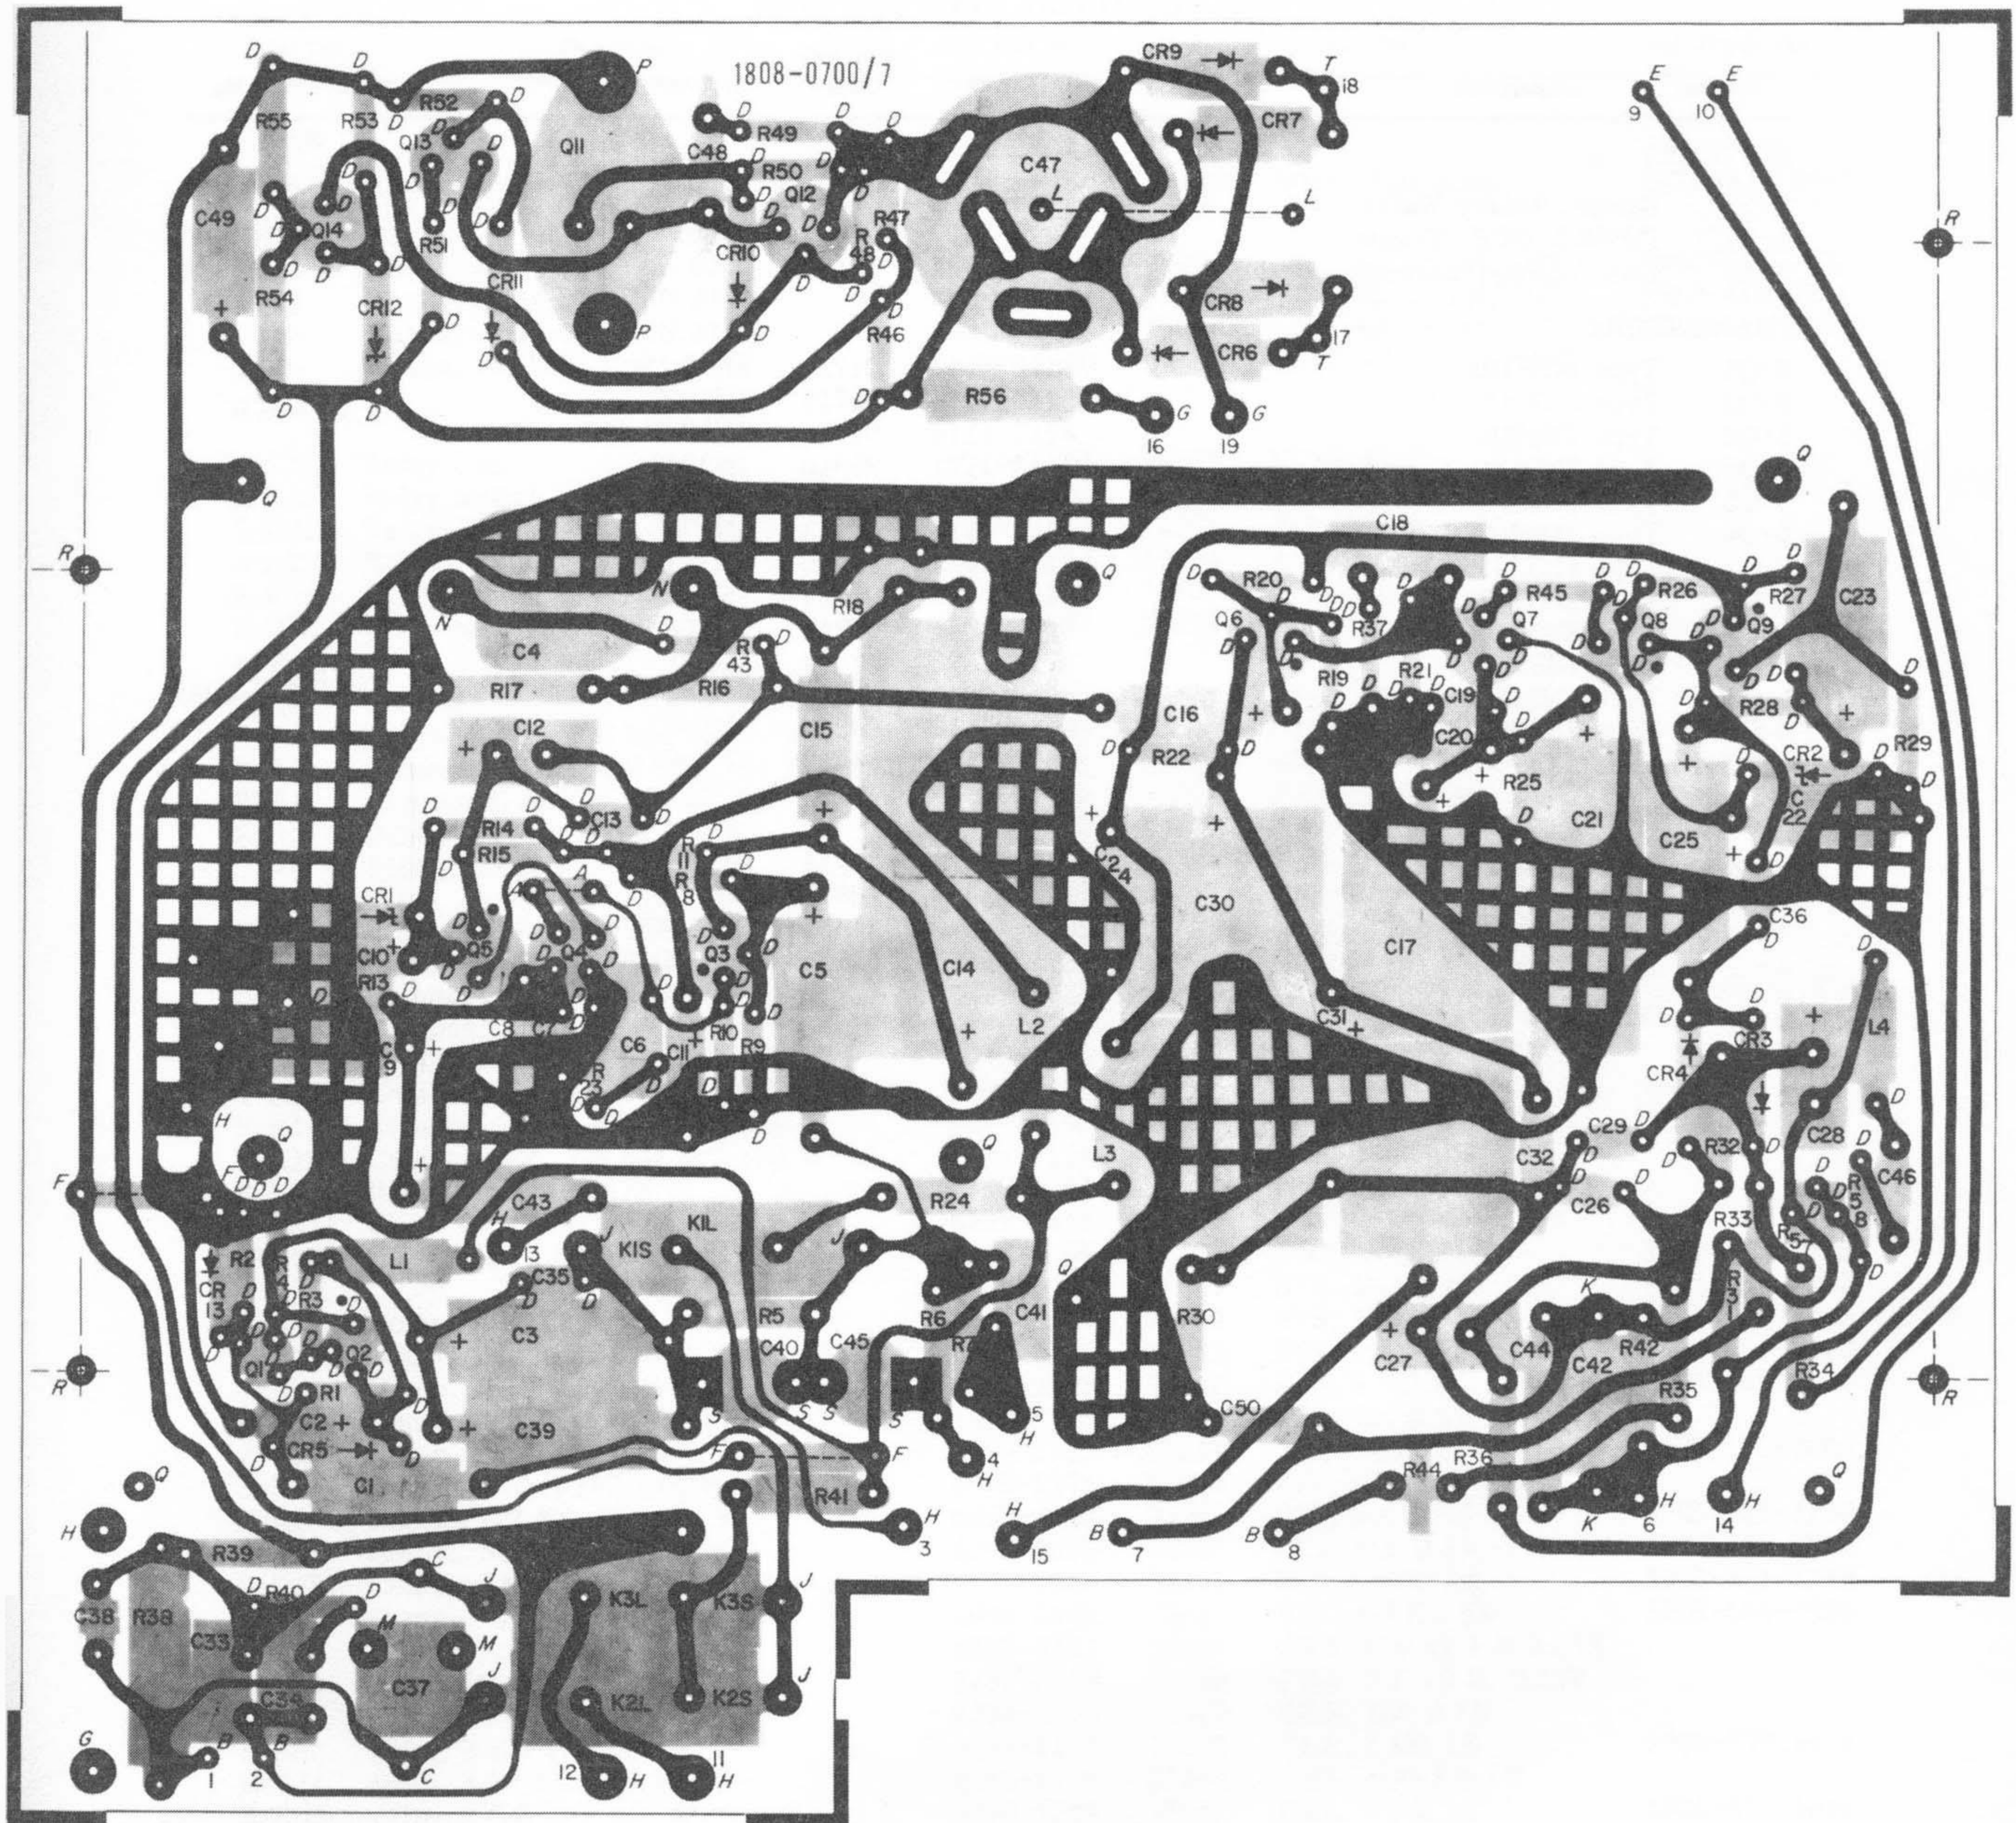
Etched-circuit board assembly, B-Voltmeter board (P/N 1808-4700).
